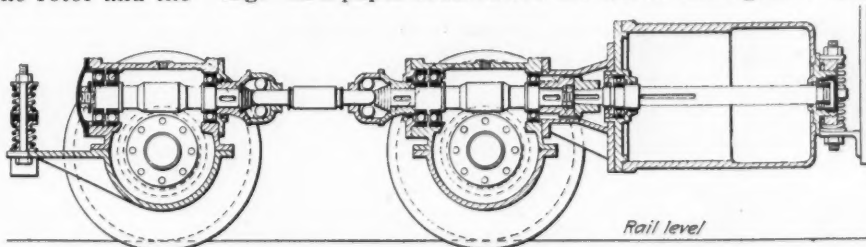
Ball Bearings Used with Locomotive Drive Shaft
